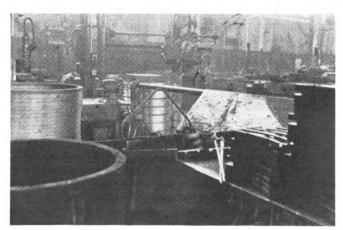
After assembly the rings are dipped in a bath of lubricant, made up in sets and wrapped in burlap for shipment to the outlying points on the system
